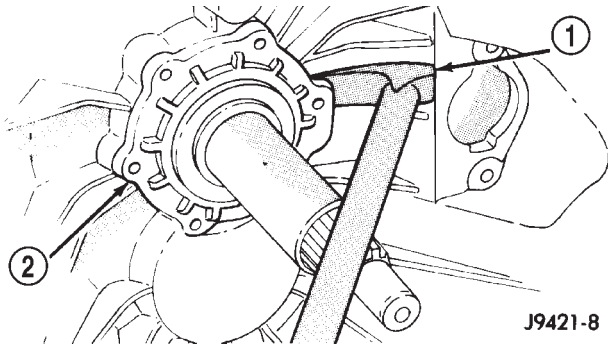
Loosening Bearing Retainer Sealer Bead—Typical
